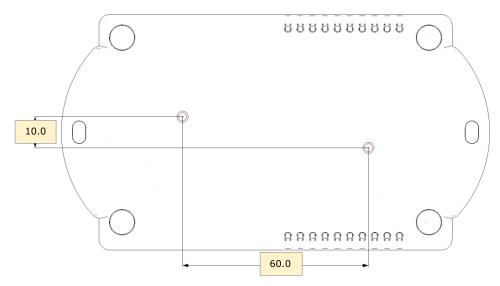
LDSBus Isolated IO Controller Dimension - Bottom View
